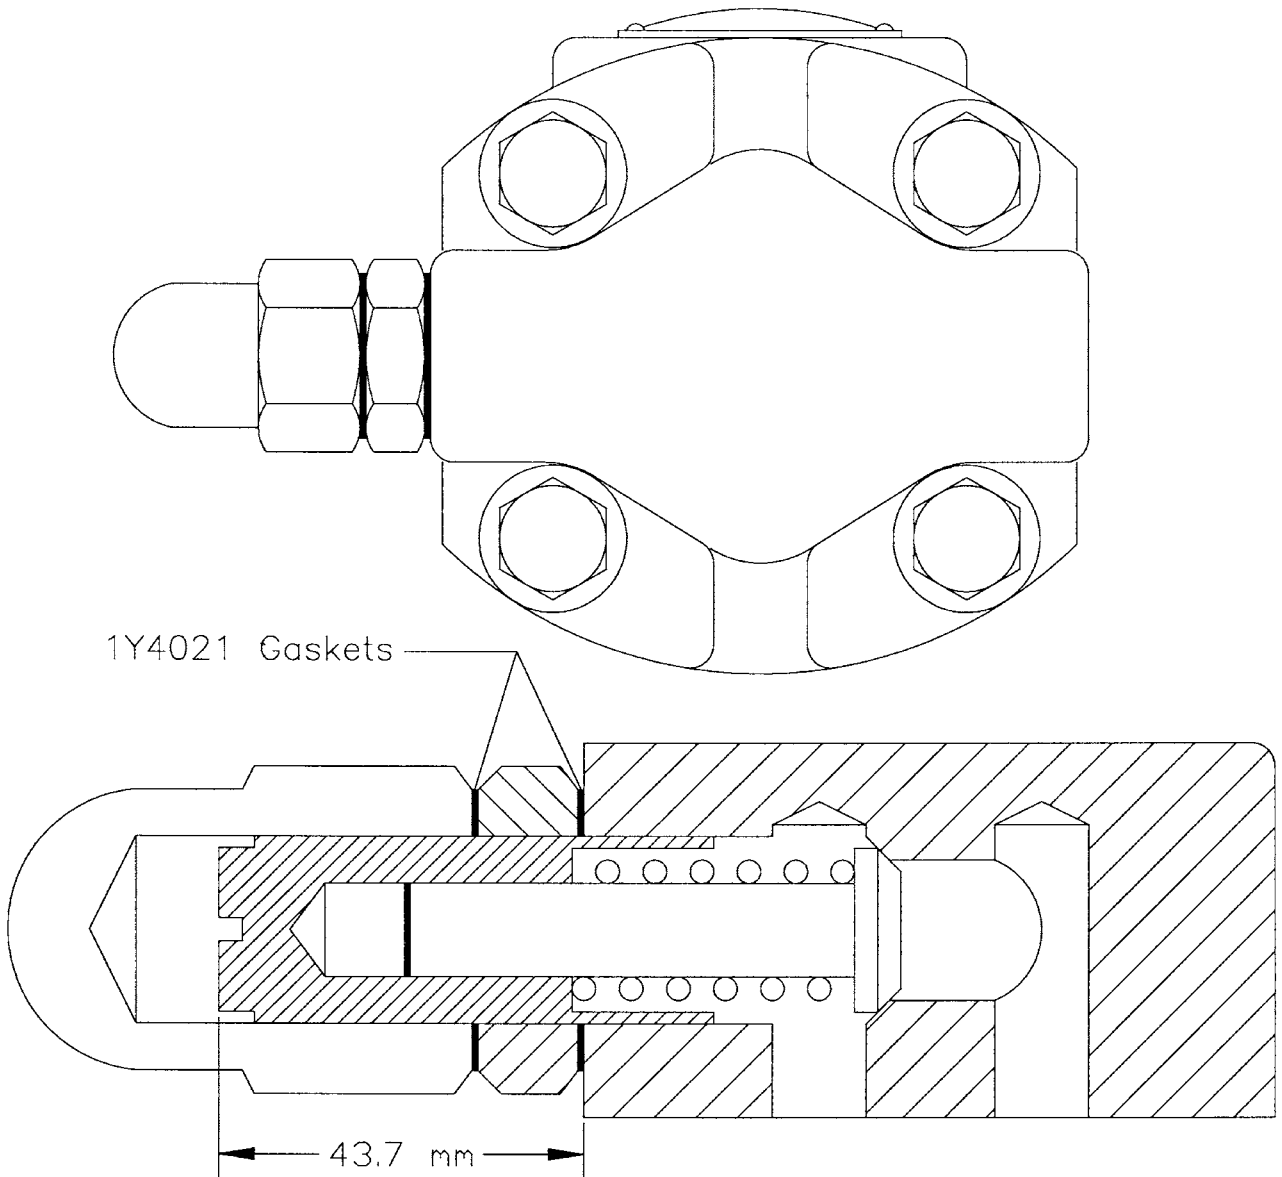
1Y3661 Oil Pump and 1Y4021 Gaskets
